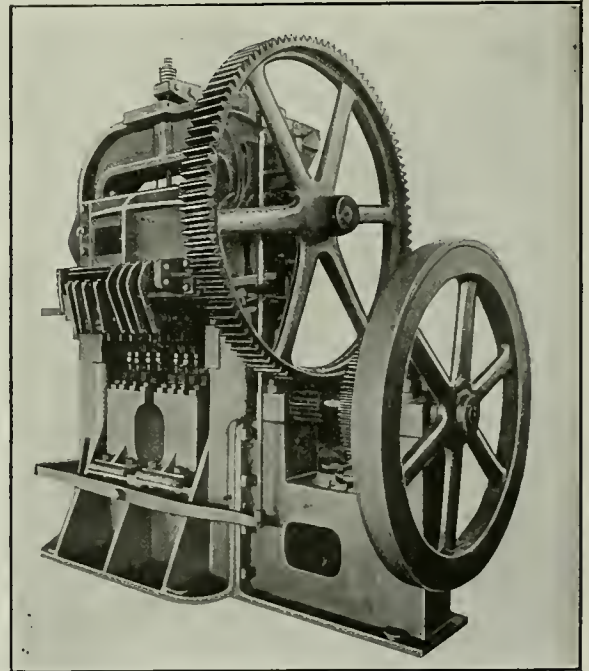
Punch Equipped with Tools for Multiple Punching of Plates
